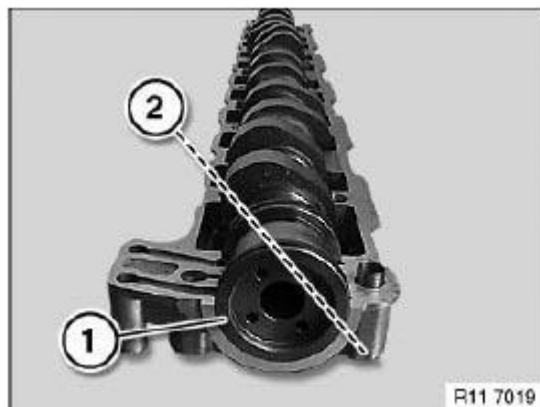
Rotating Intake Camshaft At Cylinder No. 1
